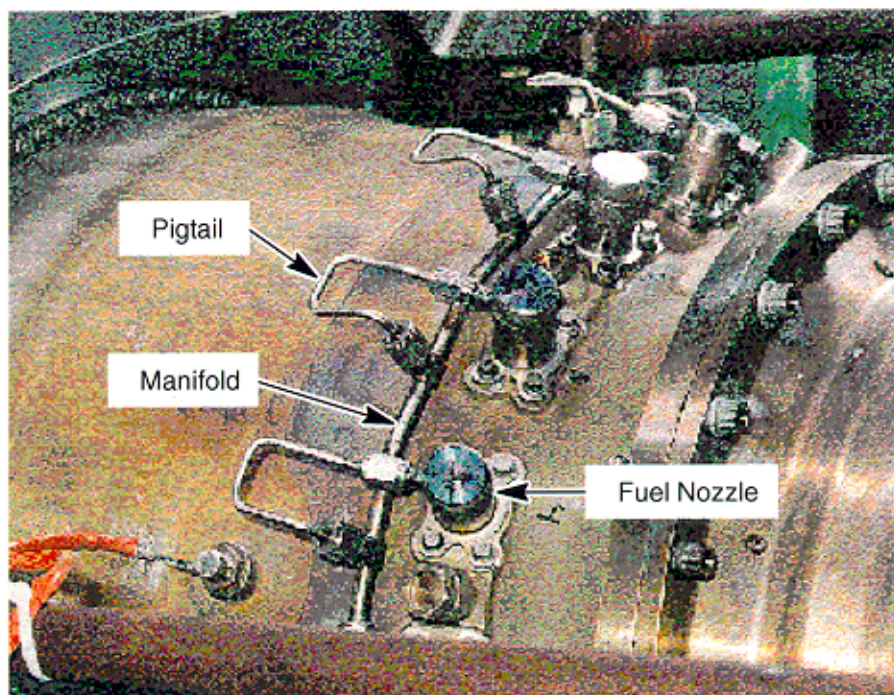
Fuel Manifold *A single manifold supplies fuel to the 18 fuel nozzles; pigtails connect the fuel nozzles to the manifold.
